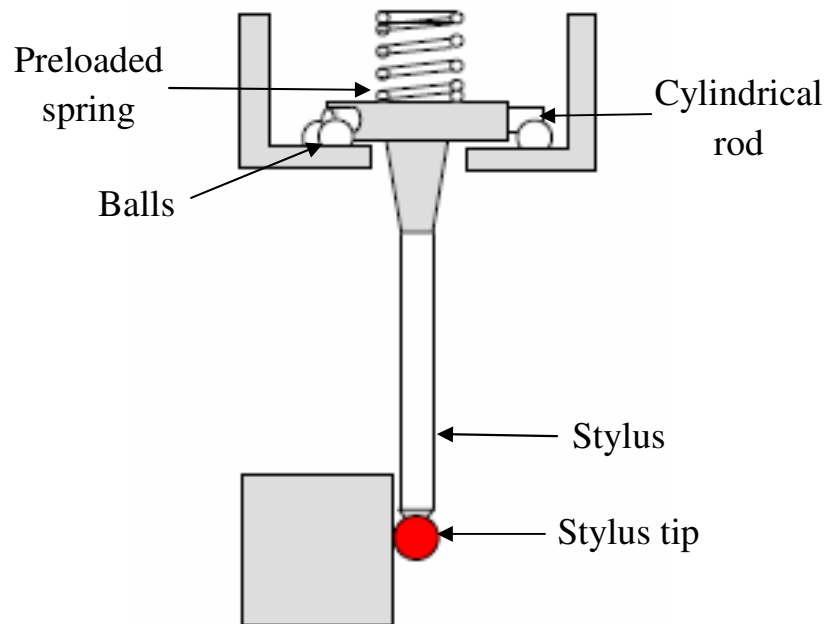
Touch trigger based probe system of a coordinate measuring machine [29]
